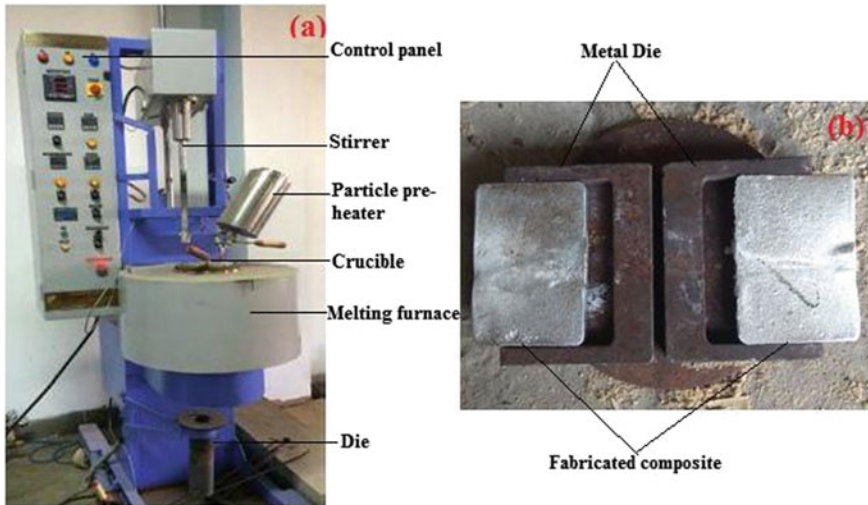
Stir casting: a bottom pouring type experimental setup, b composite with metal die
